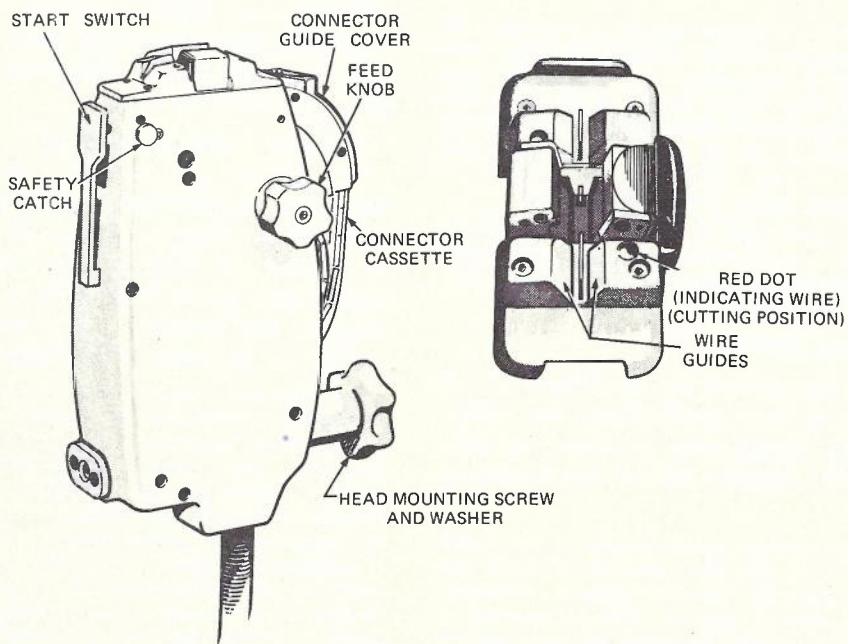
Machine Cable Jointing No. 4 (Plessey).
